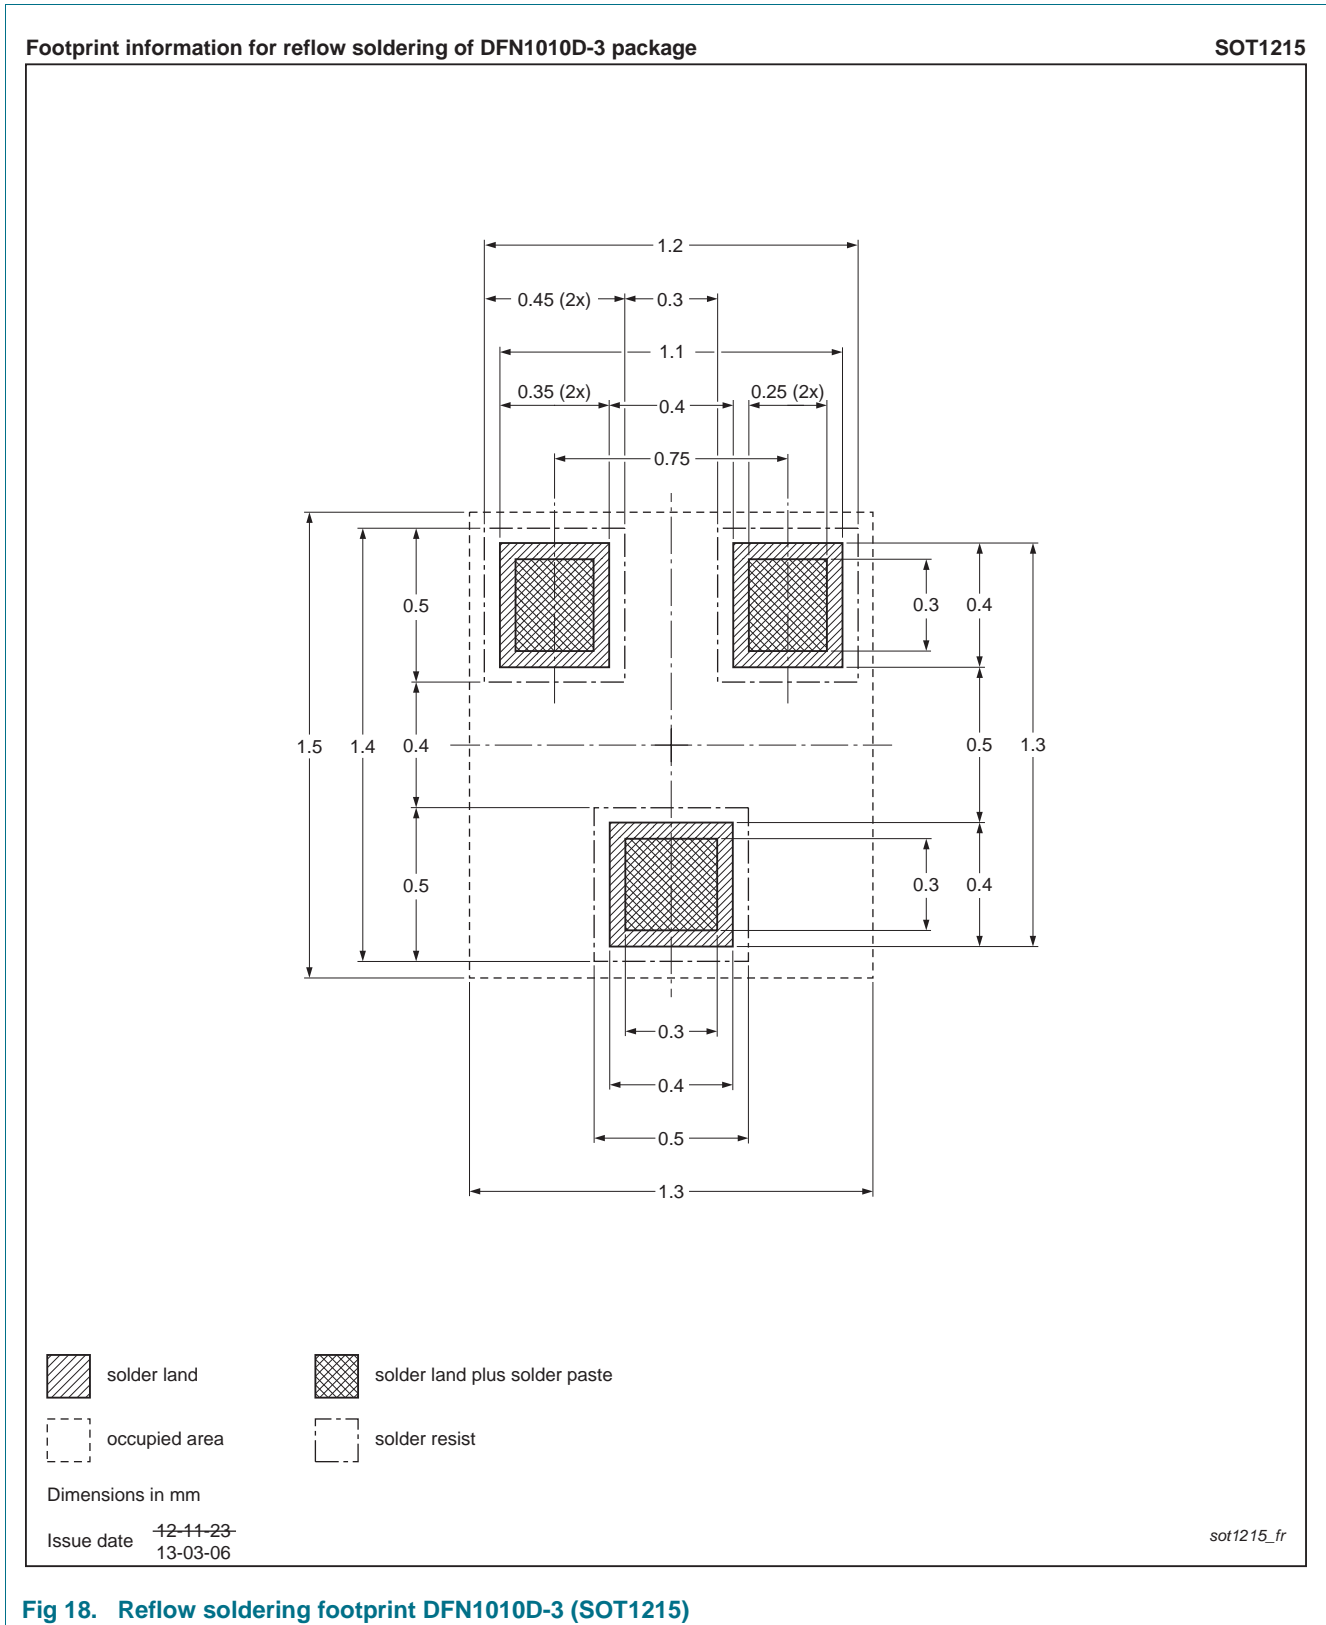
Reflow soldering footprint DFN1010D-3 (SOT1215)
